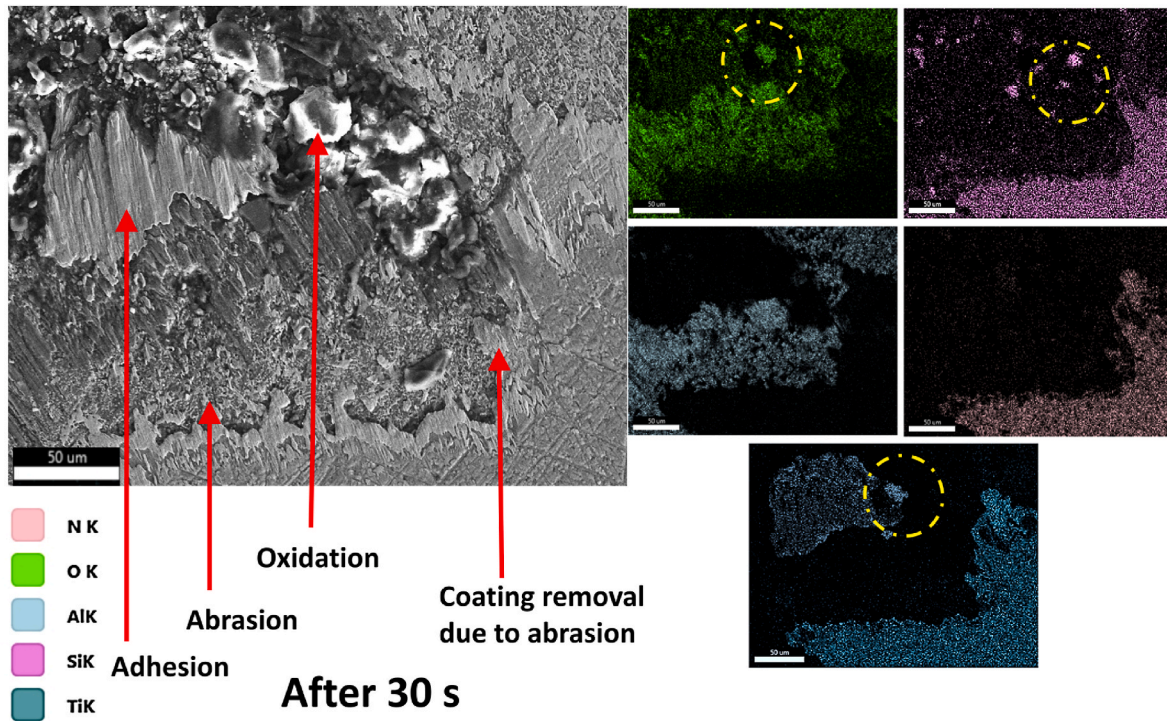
SEM micrographs showing wear on the rake surface of TiSiN coated tool after 30 s of machining.
